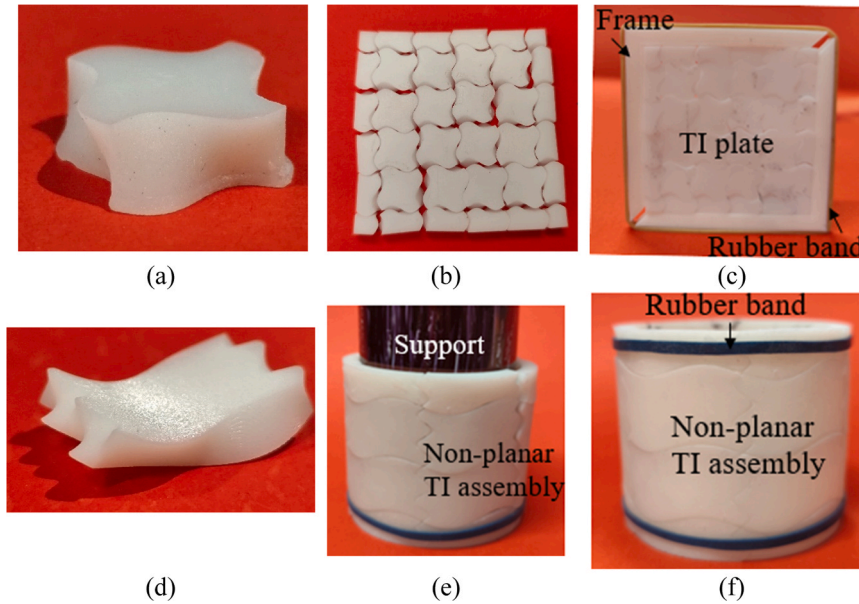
Examples of 3D printed TI structures: (a) planar TI element, (b) positioning planar elements, (c) planar TI structure, (d) non-planar TI element, (e) positioning non-planar elements, and (f) tubular structure.
